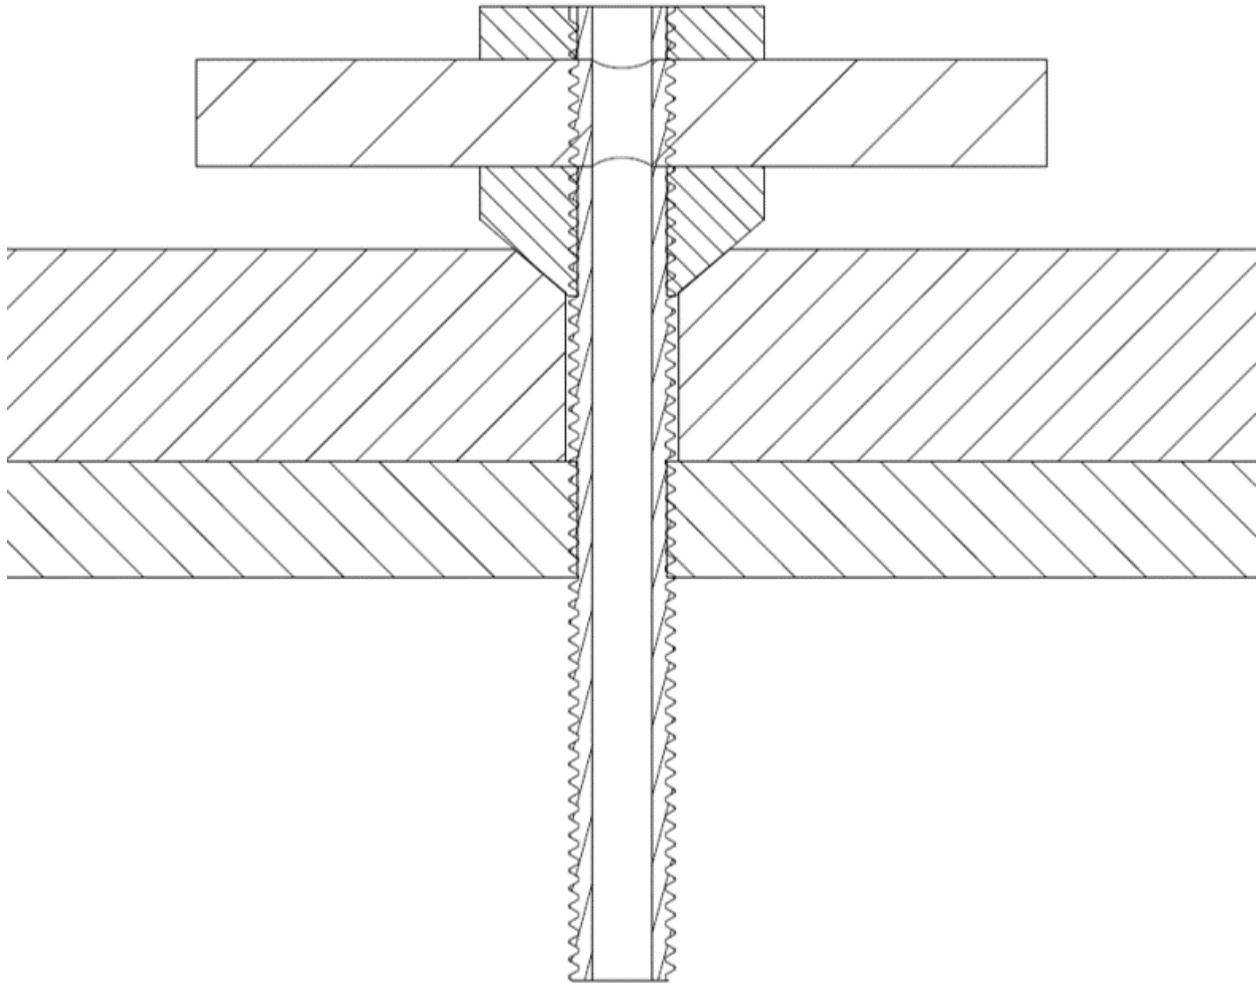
Section view of a screw-type electrode inserted in the stern tube. Silver strip and cable not shown.
